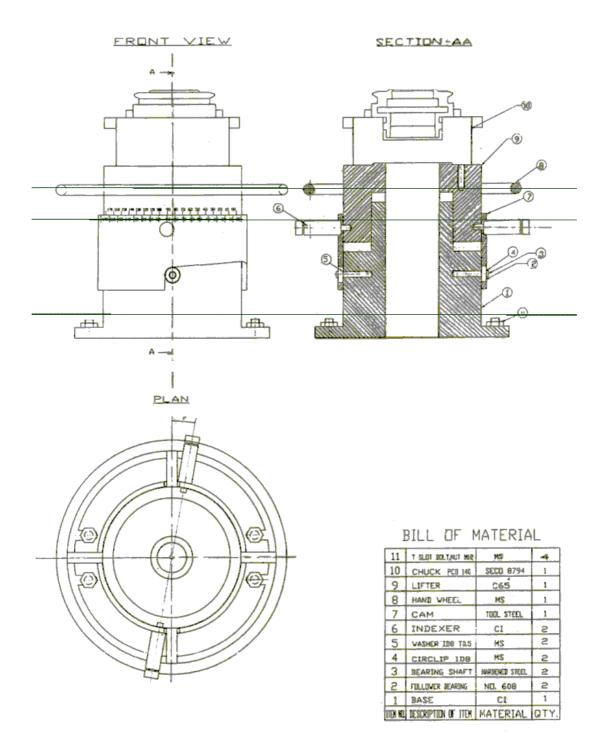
Assembly Drawing of Milling Fixture for Discontinuous Threads
